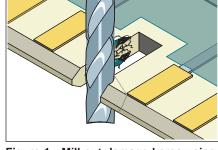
Mill out damaged area using a carbide end mill.
